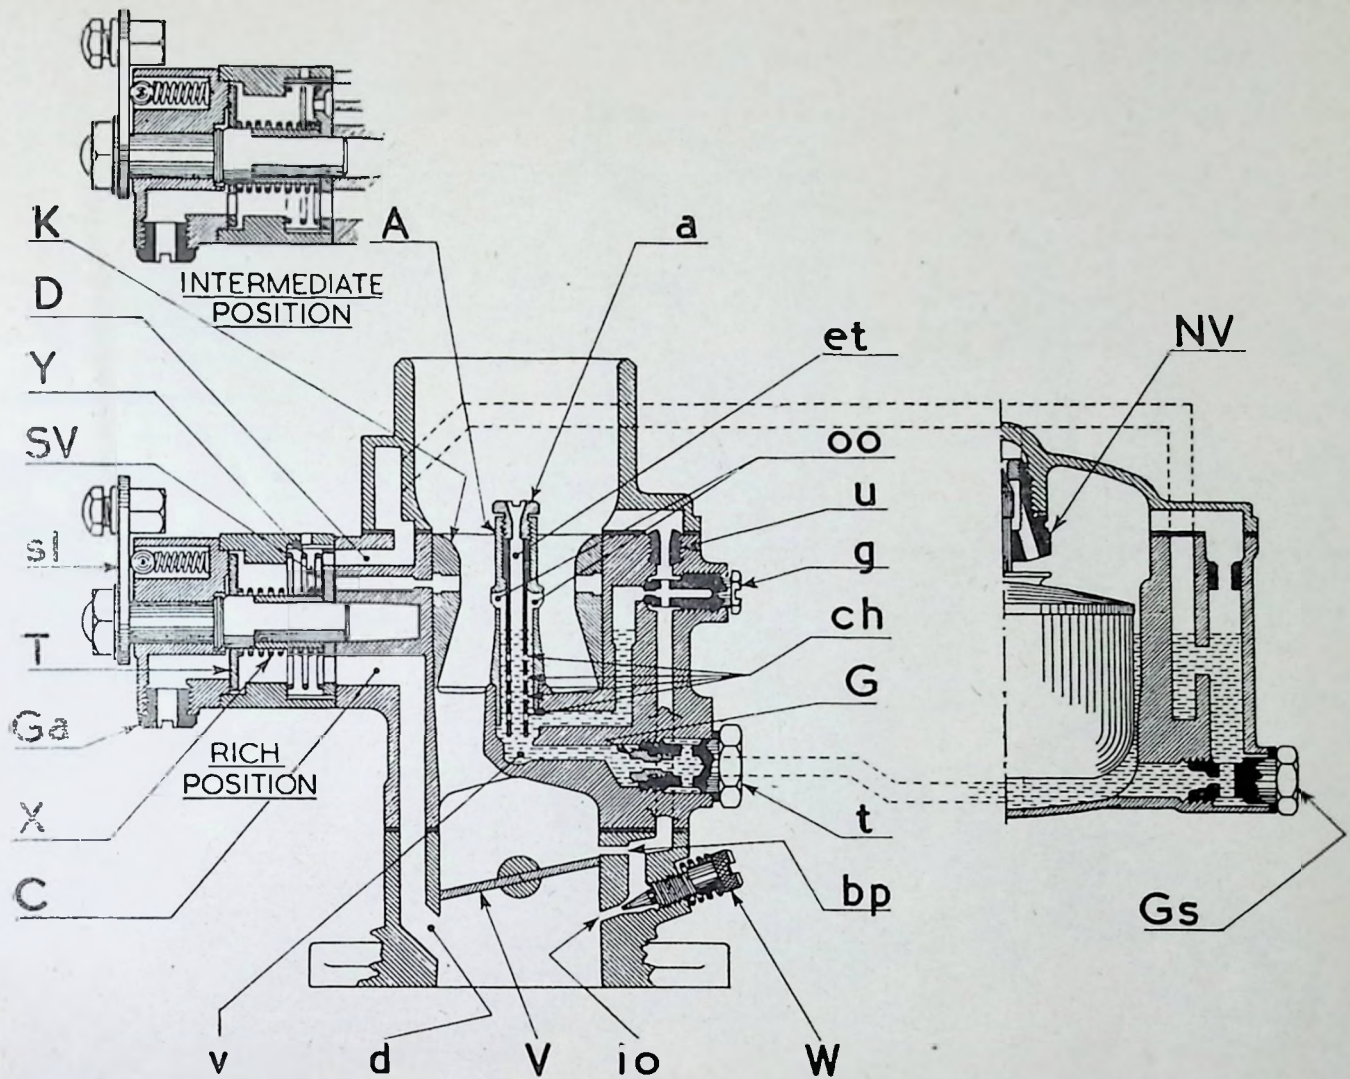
Sectional view of the Solex FA10-2 model carburetter.
